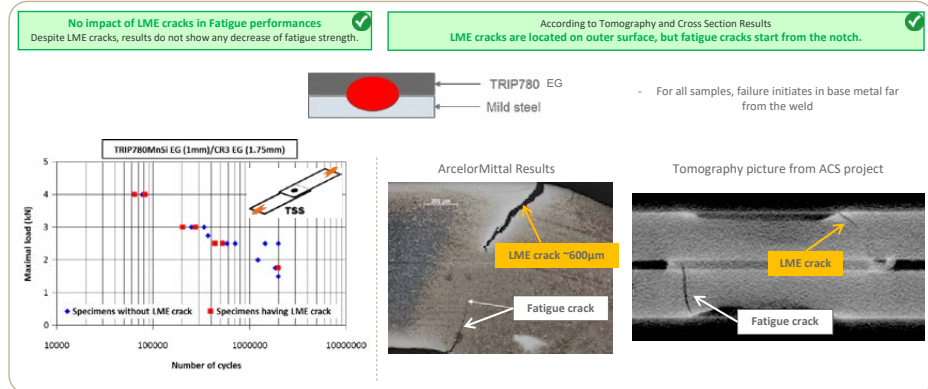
Impact of LME cracks on fatigue behaviour (TSS).
